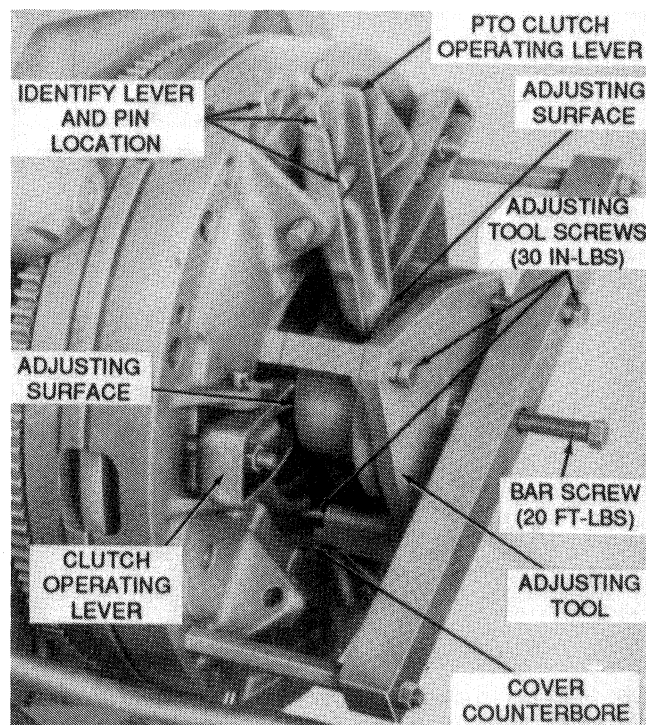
JDE-78 clutch adjusting tool with proper spacer plates is required to accurately adjust Perma-Clutch.
